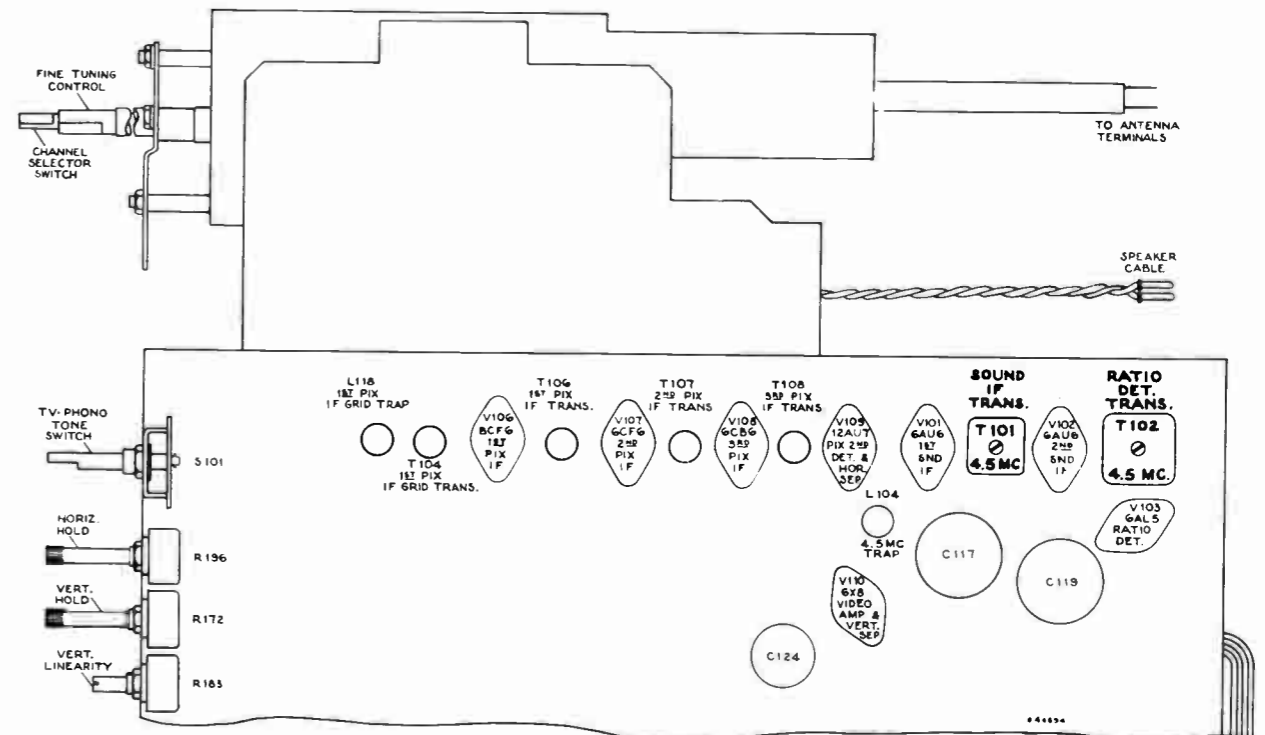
Bottom Chassis Adjustments (KRK29 Tuner shown)
